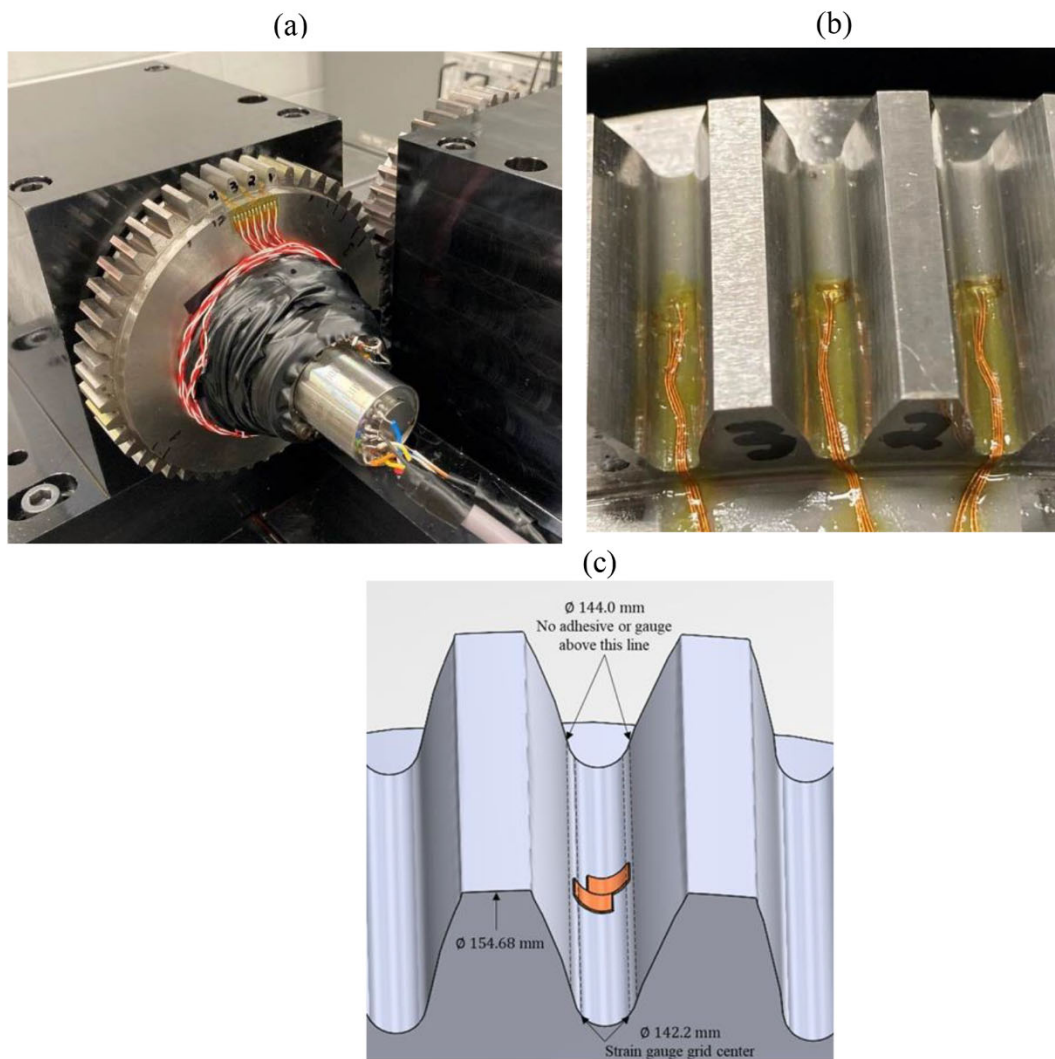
An image of (a) the instrumented test gear pair on the test machine, (b) a close-up images of the strain gauged tooth roots, and (c) a schematic defining gauge locations.
